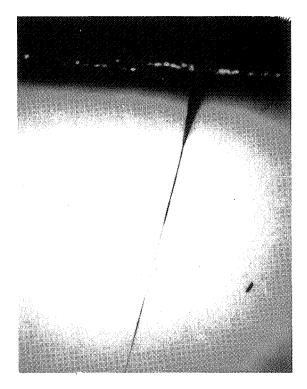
Edge crack at polish. Fig. 14. Edge crack at polish.
